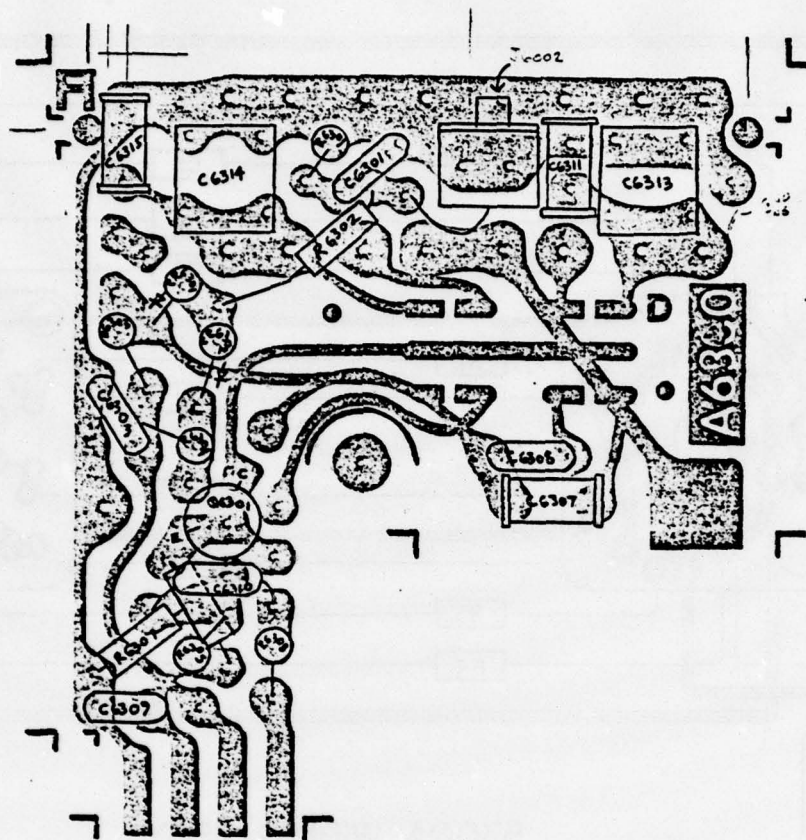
P.C. BOARD LAYOUT FOR THE A6300A
